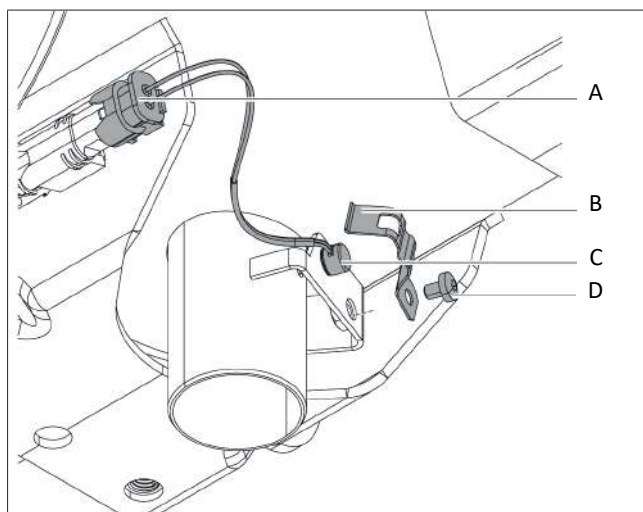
Exhaust gas temperature sensor with connector, clip and screw
